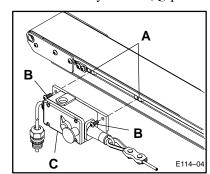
E-Stop Box Assembly to Conveyor Attachment Detail
